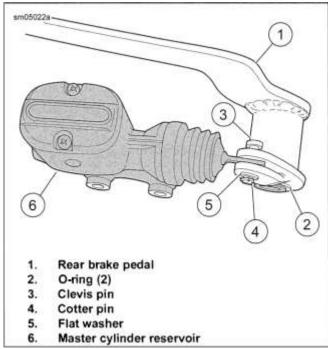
Rear Master Cylinder/Brake Pedal Assembly
